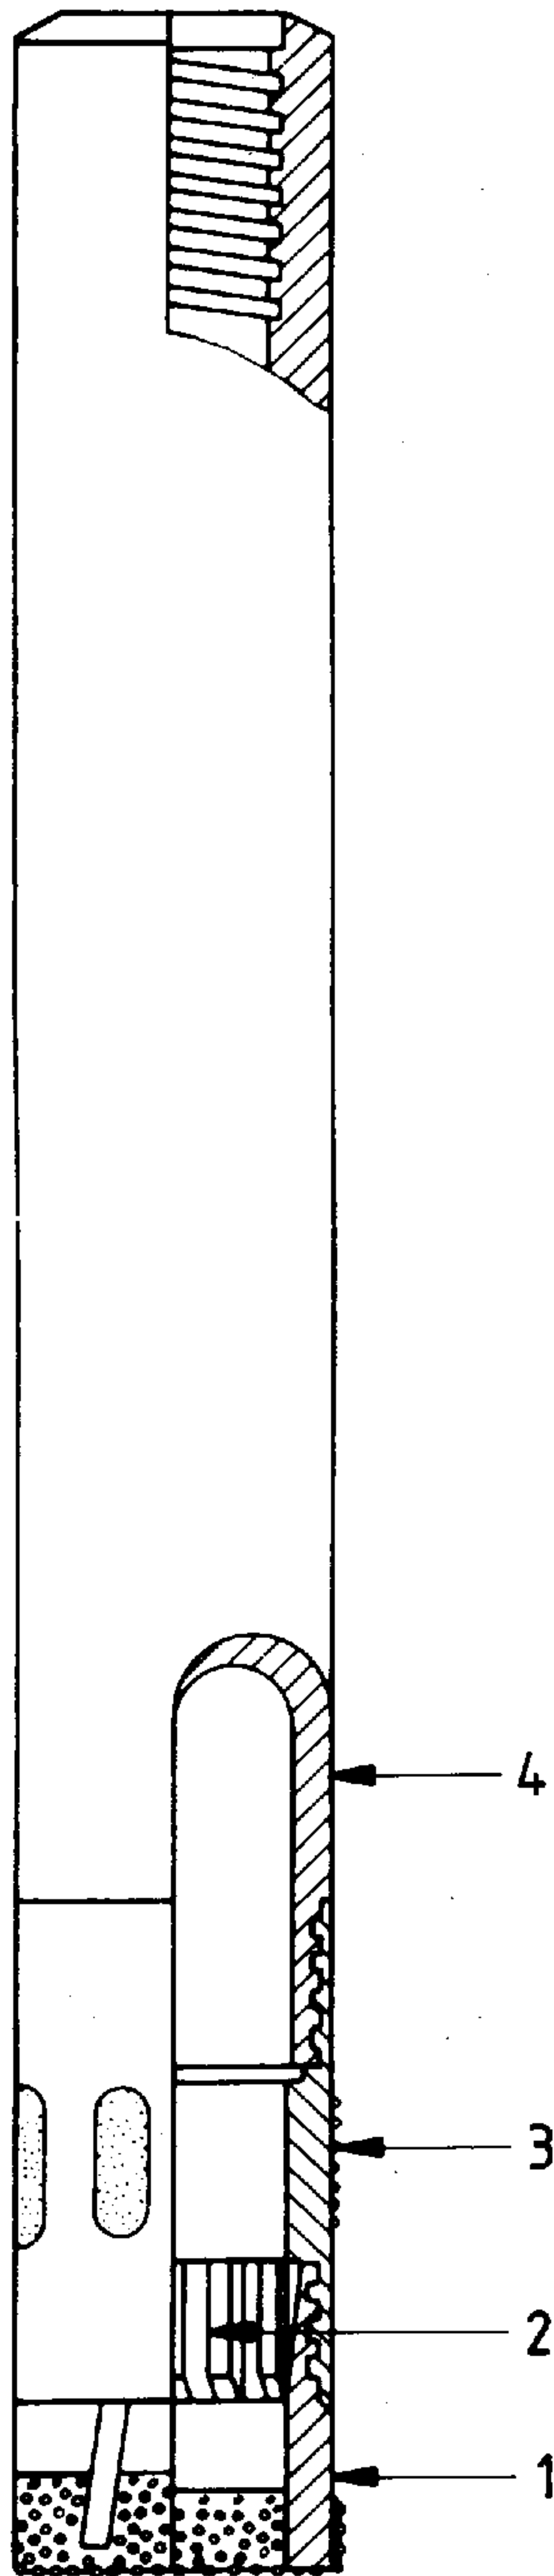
"WM" design double-tube core barrel — Head (see table 42)
